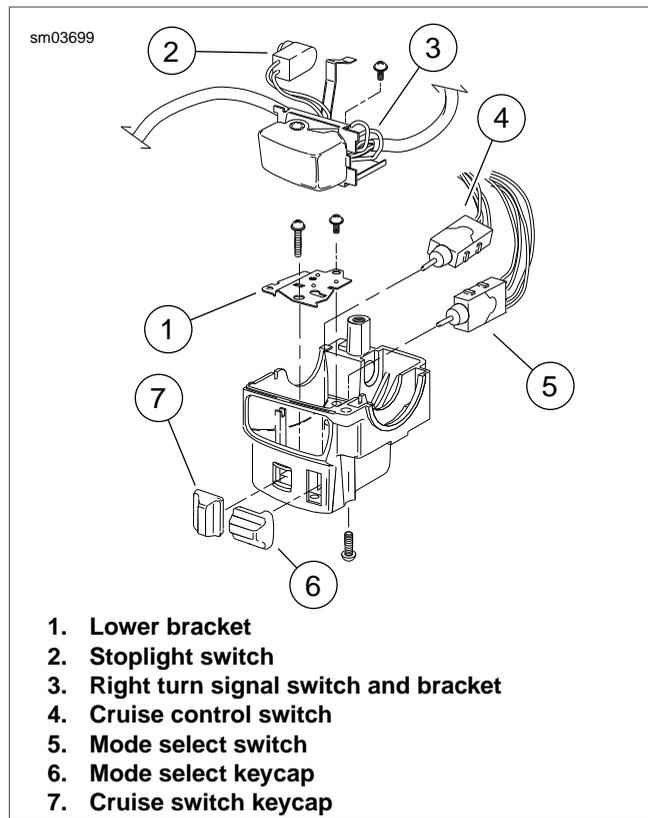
Lower Right Handlebar Switch Assembly (Ultra)
